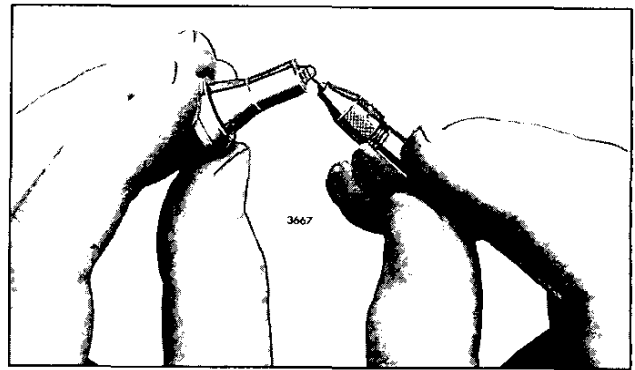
Cleaning Spray Tip Orifices with Tool J 4298-1
